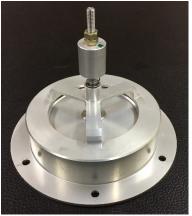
CUS/C25/C32 STAGE POPPET VALVE ASSEMBLY
